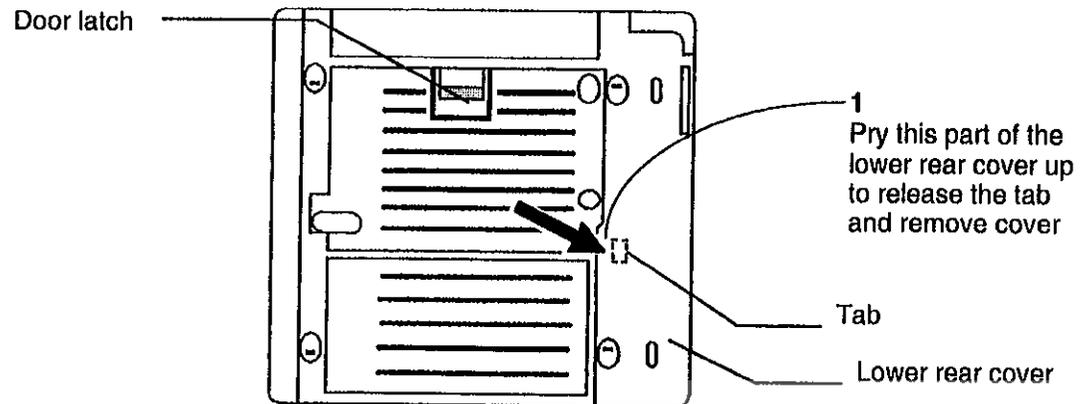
Releasing the Tab to Remove the Lower Rear Cover
